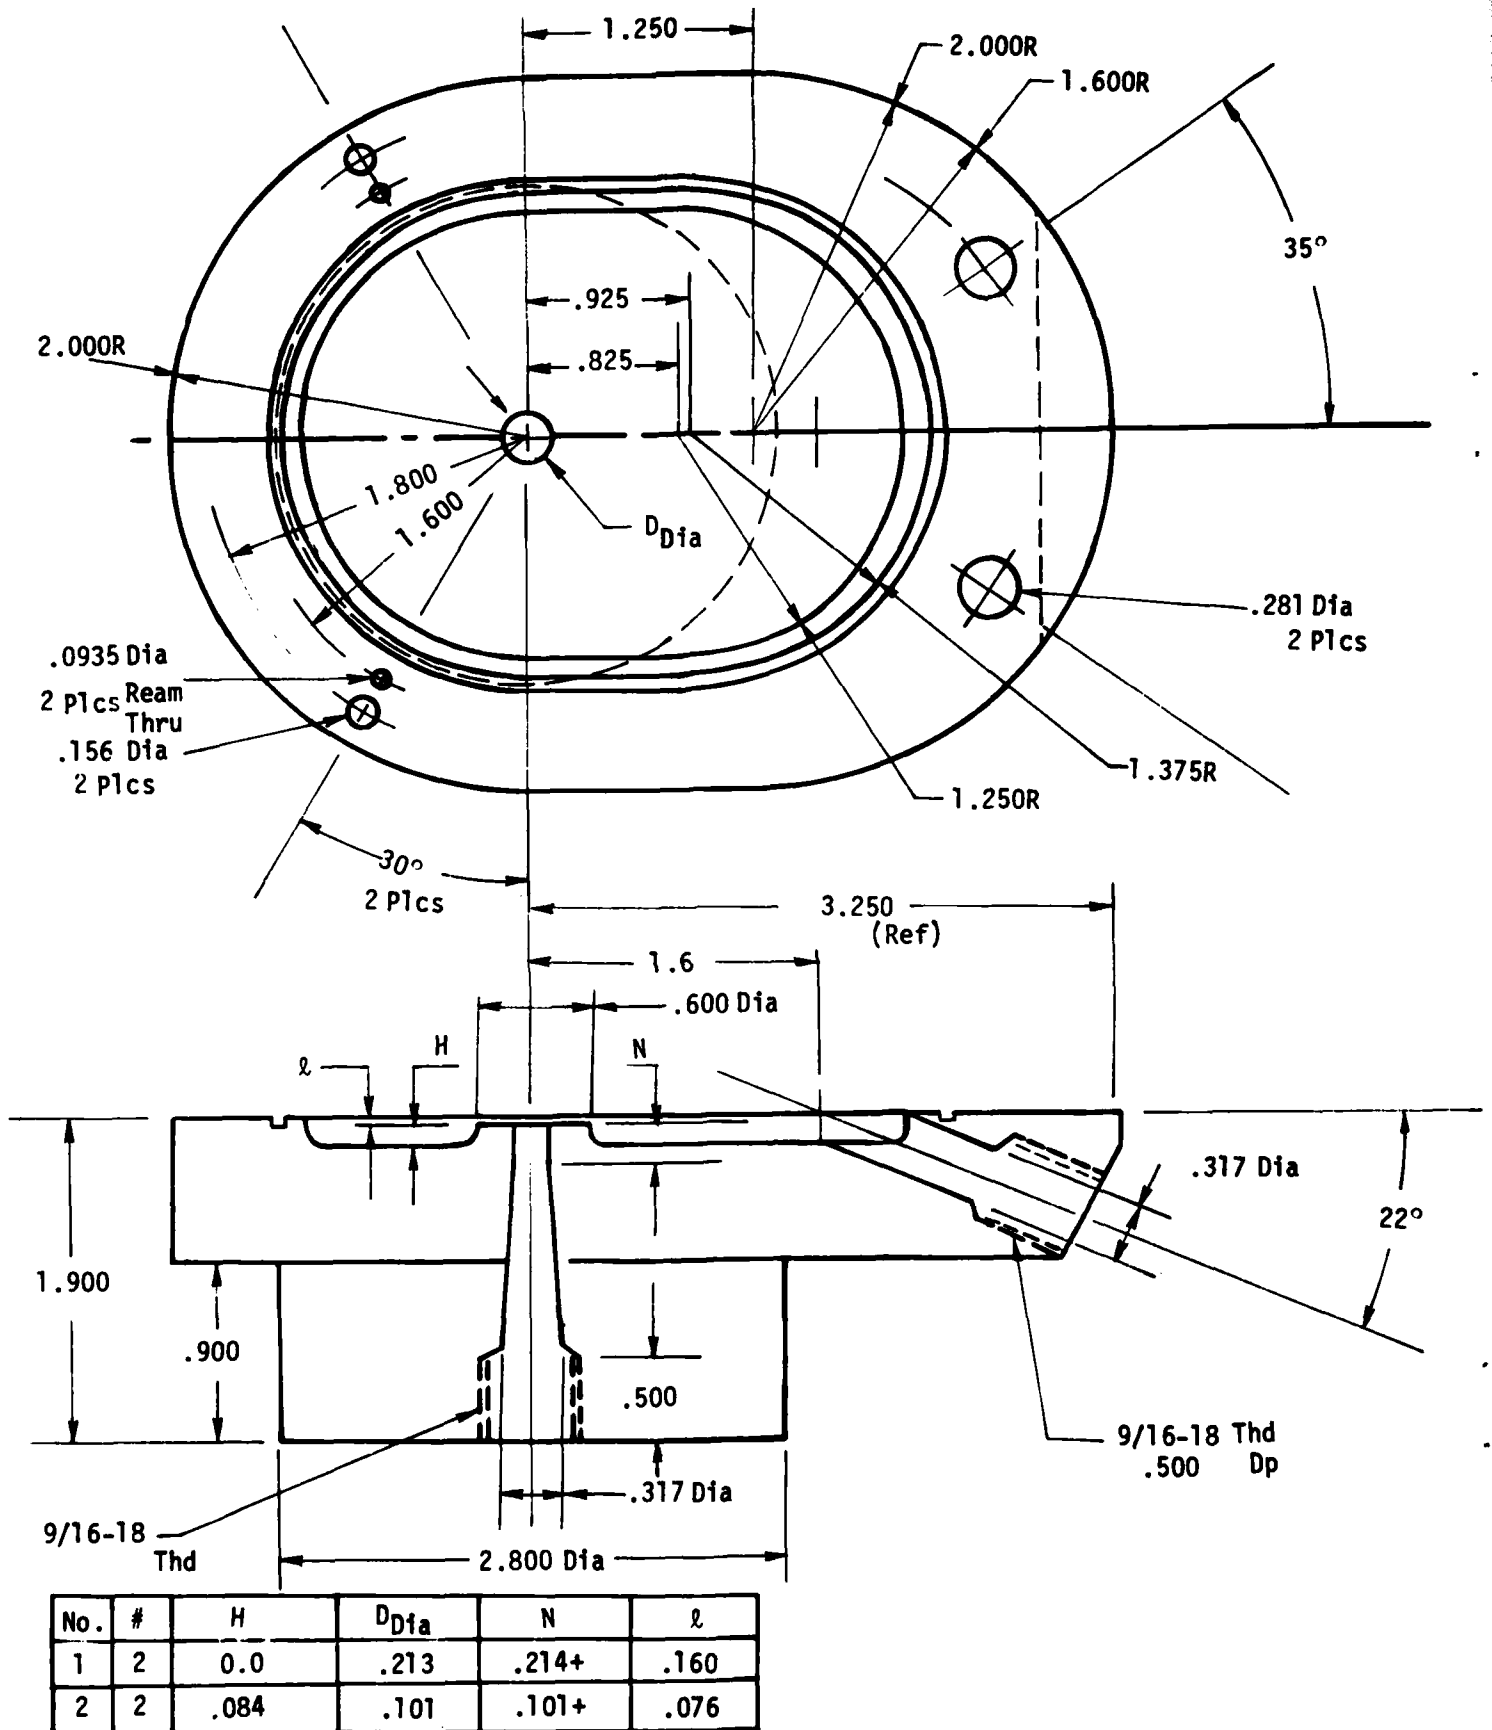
Continuous Impactor Design (All Dimensions are in Inches)
